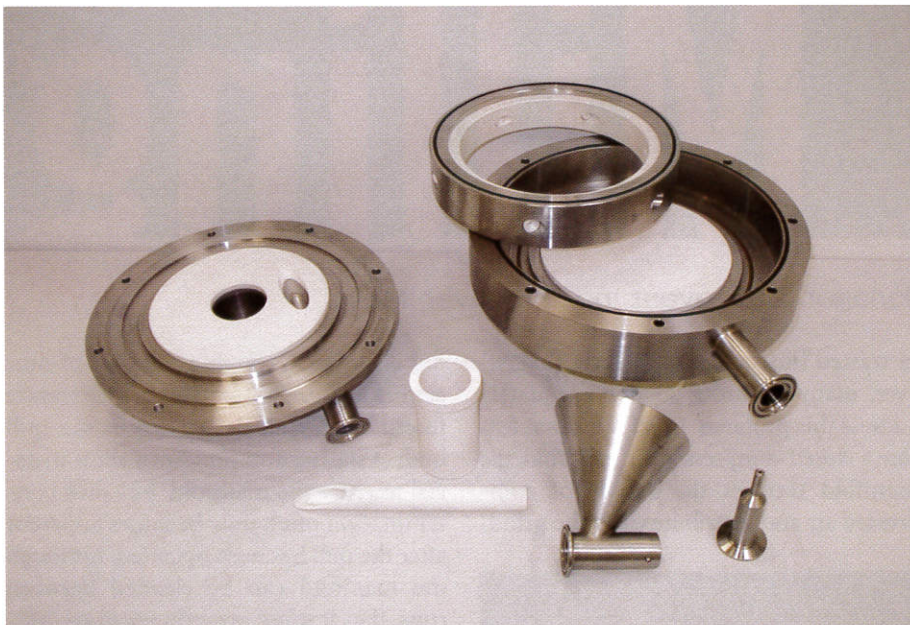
The disassembled plates and rings from an open-manifold jet mill.
